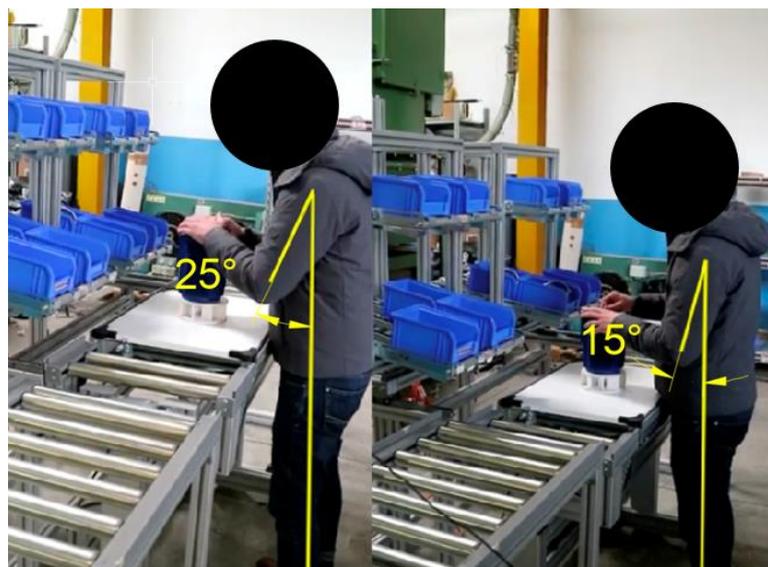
Assembly of the seal housing disk (left: fixed workstation; right: SASAS)
